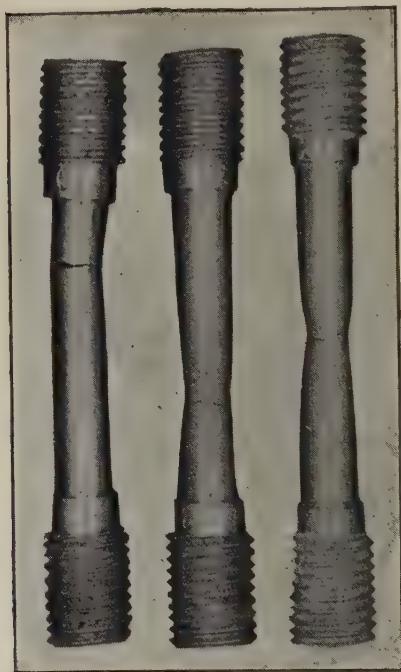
Showing Standard Tensile Test Bars Pulled Apart in a Tensile Testing Machine.
